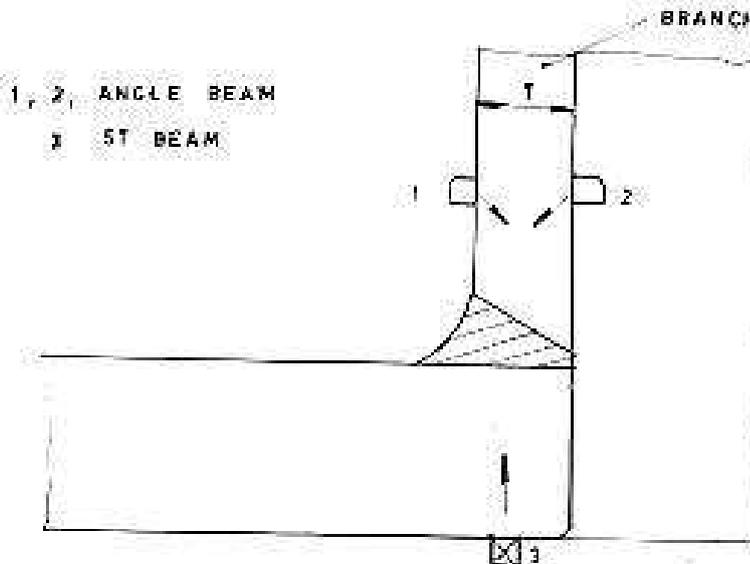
SCANNING DIRECTIONS FULL PENETRATION CORNER WELDS (SET-ON)
